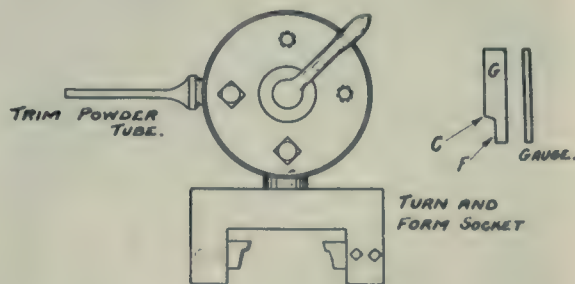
TOOLS FOR FINISHING BRASS SOCKETS.
